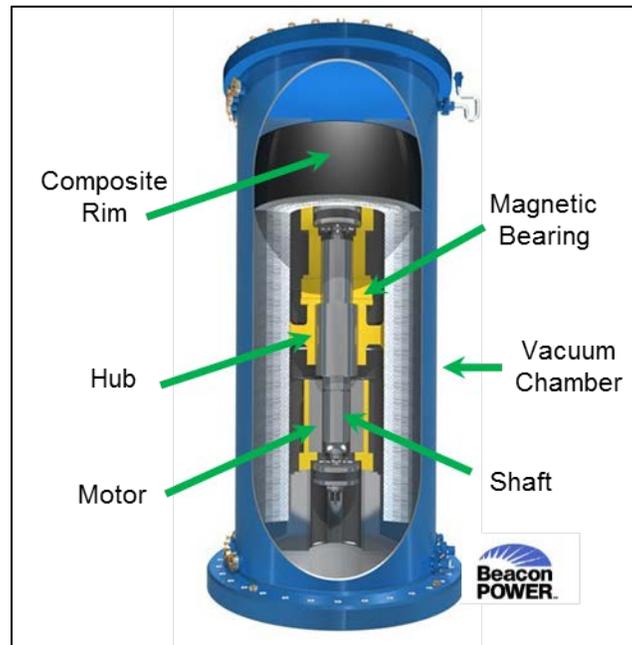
Integrated Flywheel System Package Cutaway Diagram
